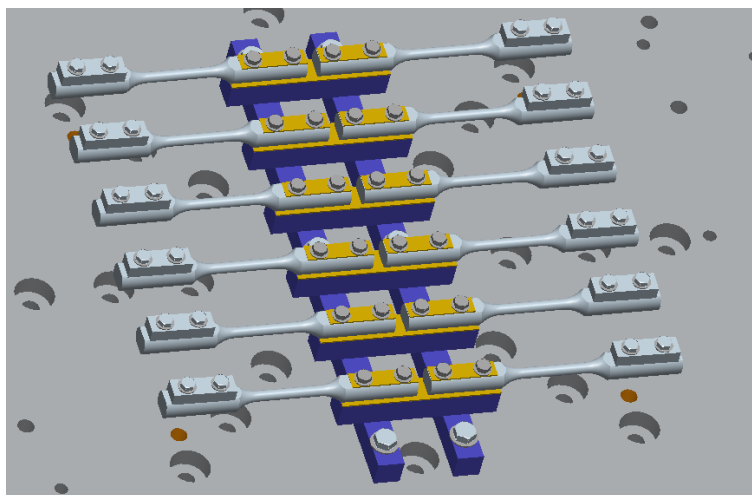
Shake Table Mounting Fixture with 12 Specimens Mounted
